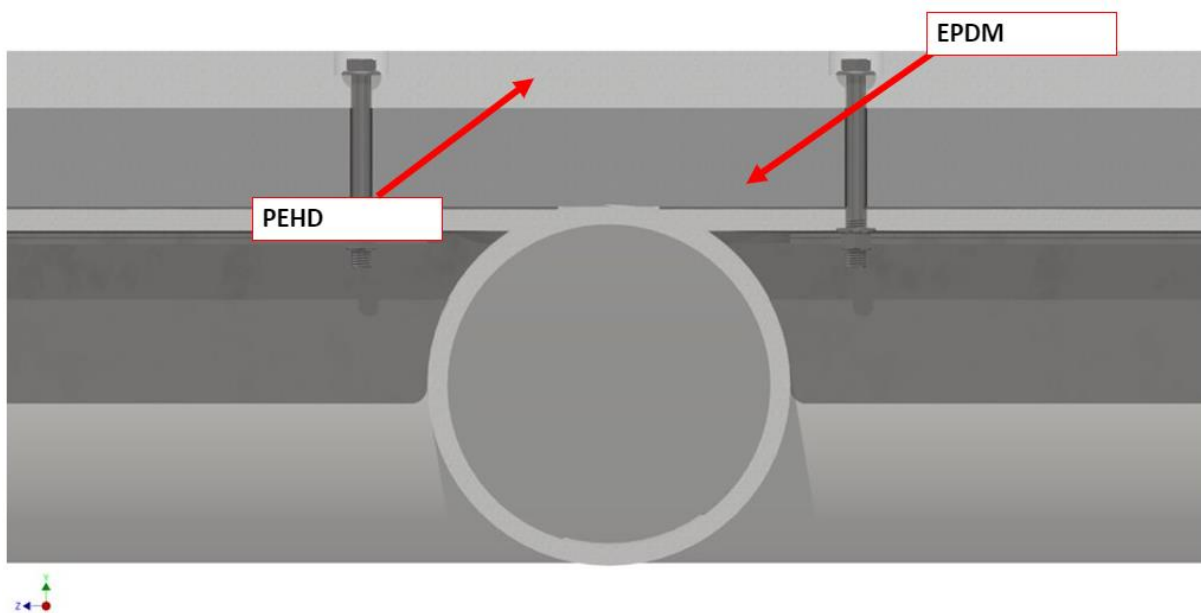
Final hatch design cross section view EPDM rubber and PEHD 1000
